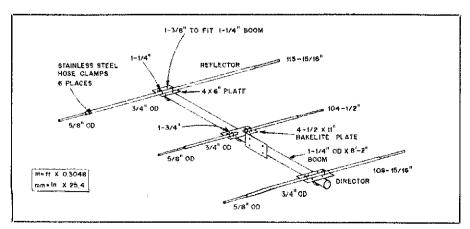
Dimensional drawing of the 3-element, 50-MHz Yagi described in the text.
